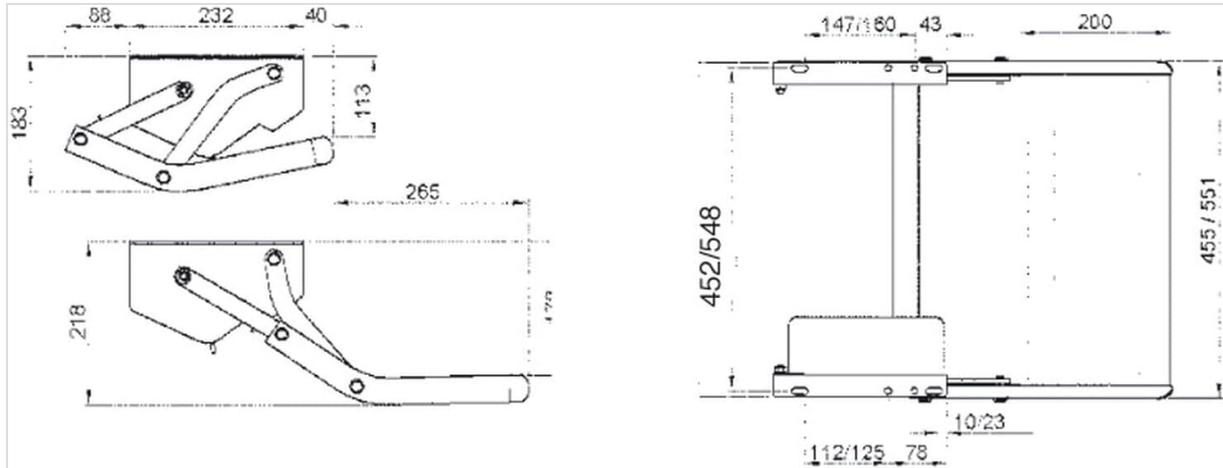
Technical dimensions for installation planning. All measurements are in millimeters.
